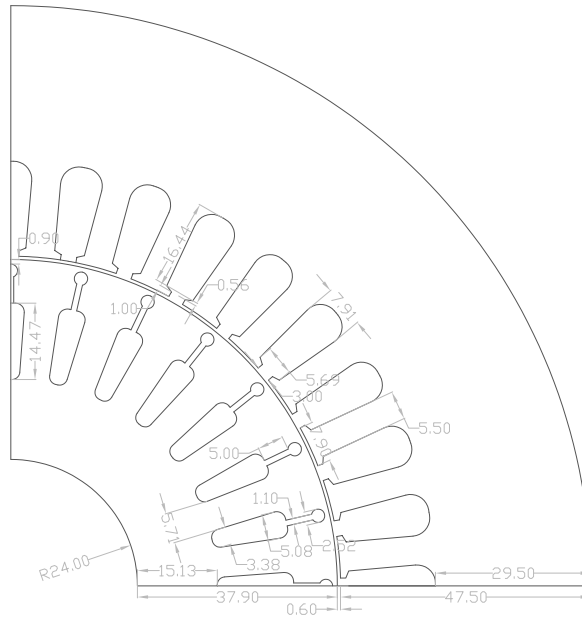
Stator and rotor core cross-sectional geometrical dimensions of a 2.7 kW, 4-pole, three-phase SCIM, with a 132S frame and a stack length of 130 mm.
